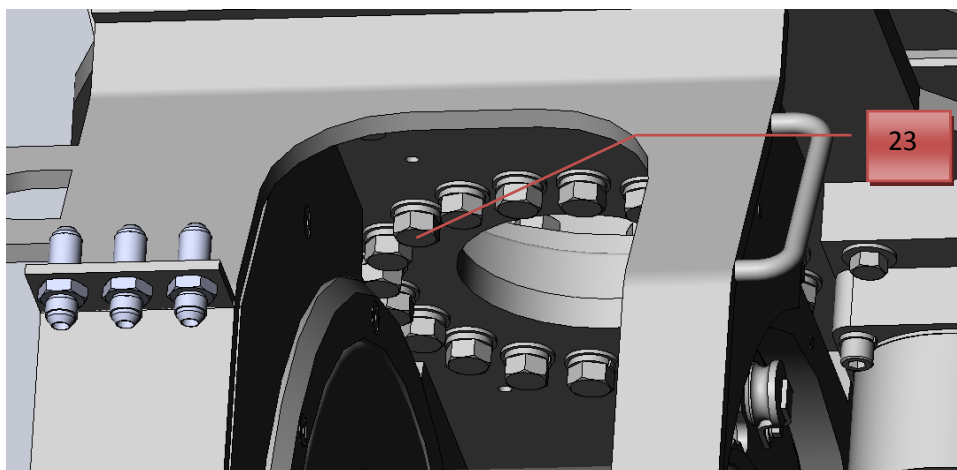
Docking Head Slew Bearing Inner Bolts Critical Failure Points
